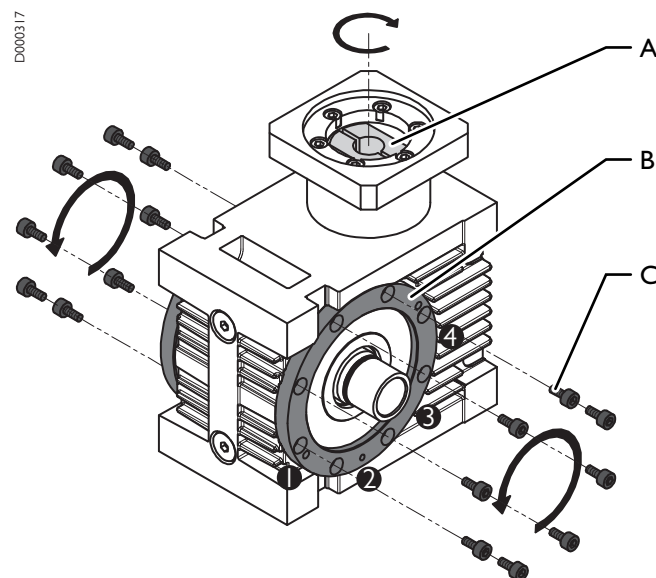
Setting the gear backlash: Güdel gearbox unit
